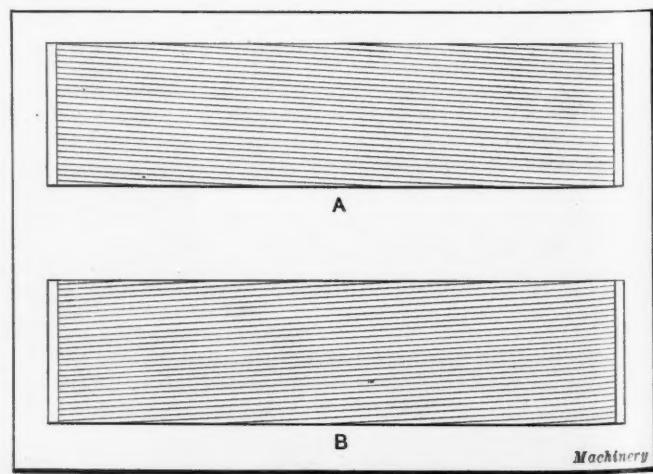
(A) Die for rolling Right-hand Threads. (B) Die for rolling Left-hand Threads
